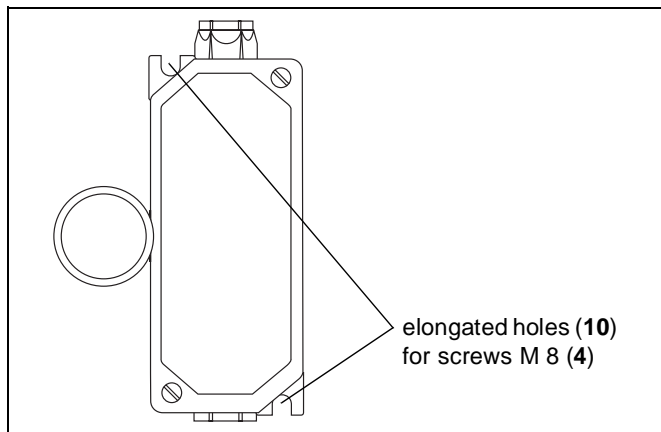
Mounting belt misalignment switches on the belt conveyor
